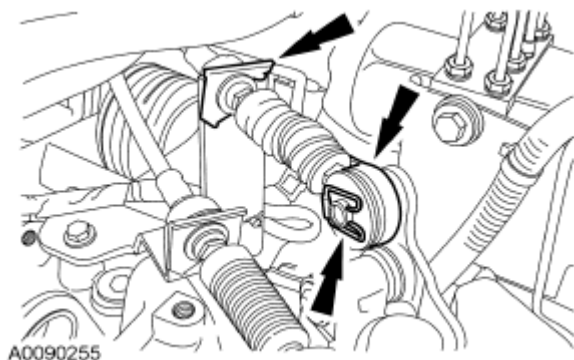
Locating Transaxle Control Cable (2 Of 2)
